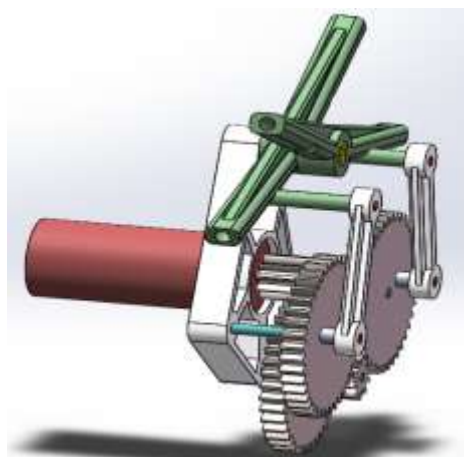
Drive mechanism modeling Fig.2-3 Drive mechanism drawing entity
